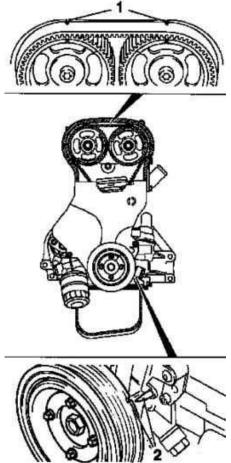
Install the crankshaft position at top dead center (TDC) of cylinder number 1: 1 - marks on the lid of the cylinder head, 2 - a label at the crankshaft
